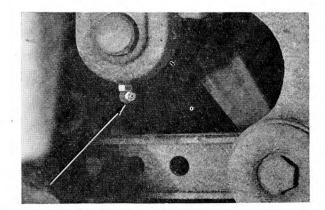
B Fig. 36A and B—Lubrication points on brake cam shaft bearings.
